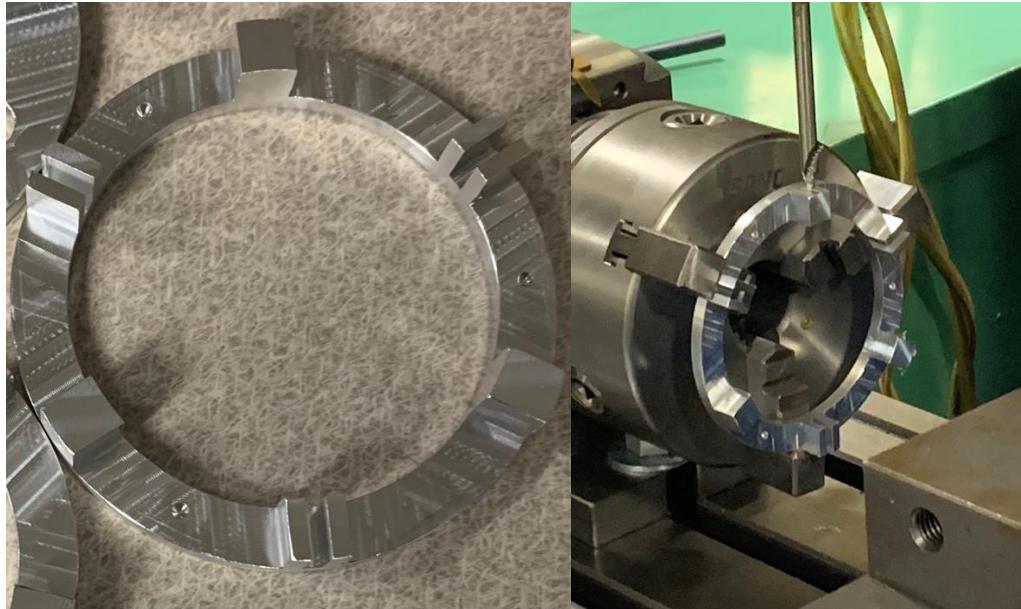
Centering ring after the CNC and holes being drilled by the mill.
